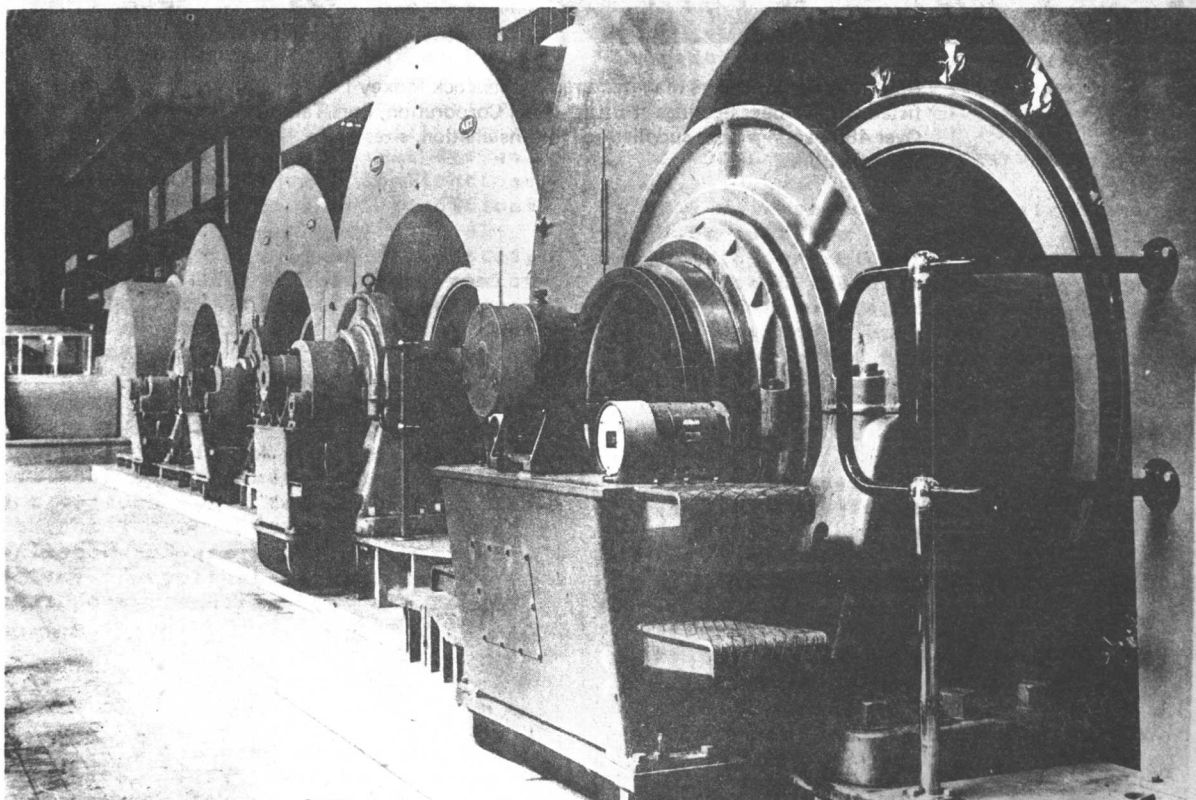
Motors by GEC Machines Ltd. on the Light Plate Mill at the British Steel Corporation Works, South Teeside. 760 mm, 24 in, and 20 in Cooper bearings in high-rise pedestals are fitted to the variable speed motors
